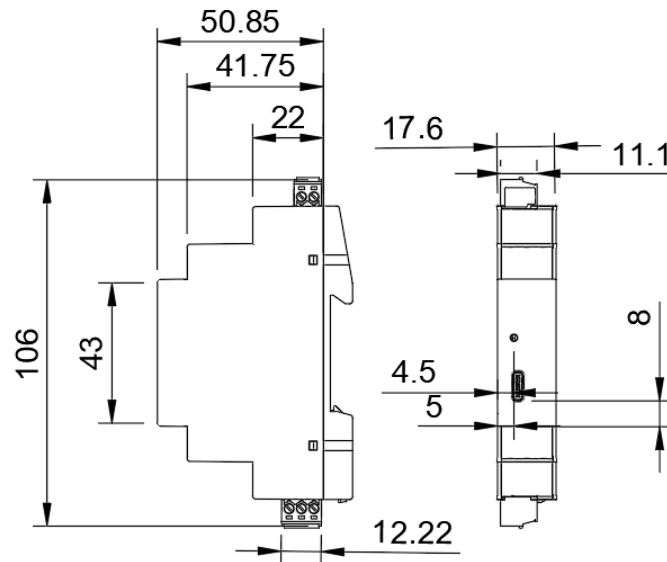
HDR20-5-12 product drawing with dimensions. All dimensions in mm.
